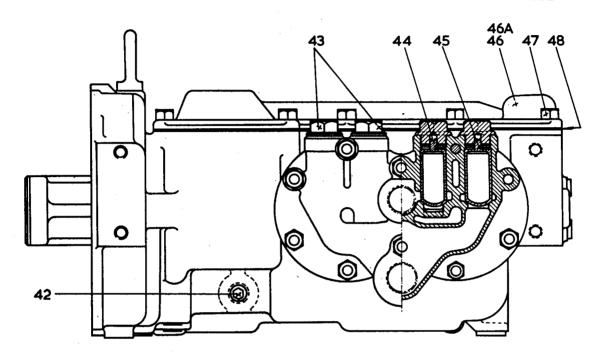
COMPRESSOR - SIDE VIEW Showing Valve Arrangement.
